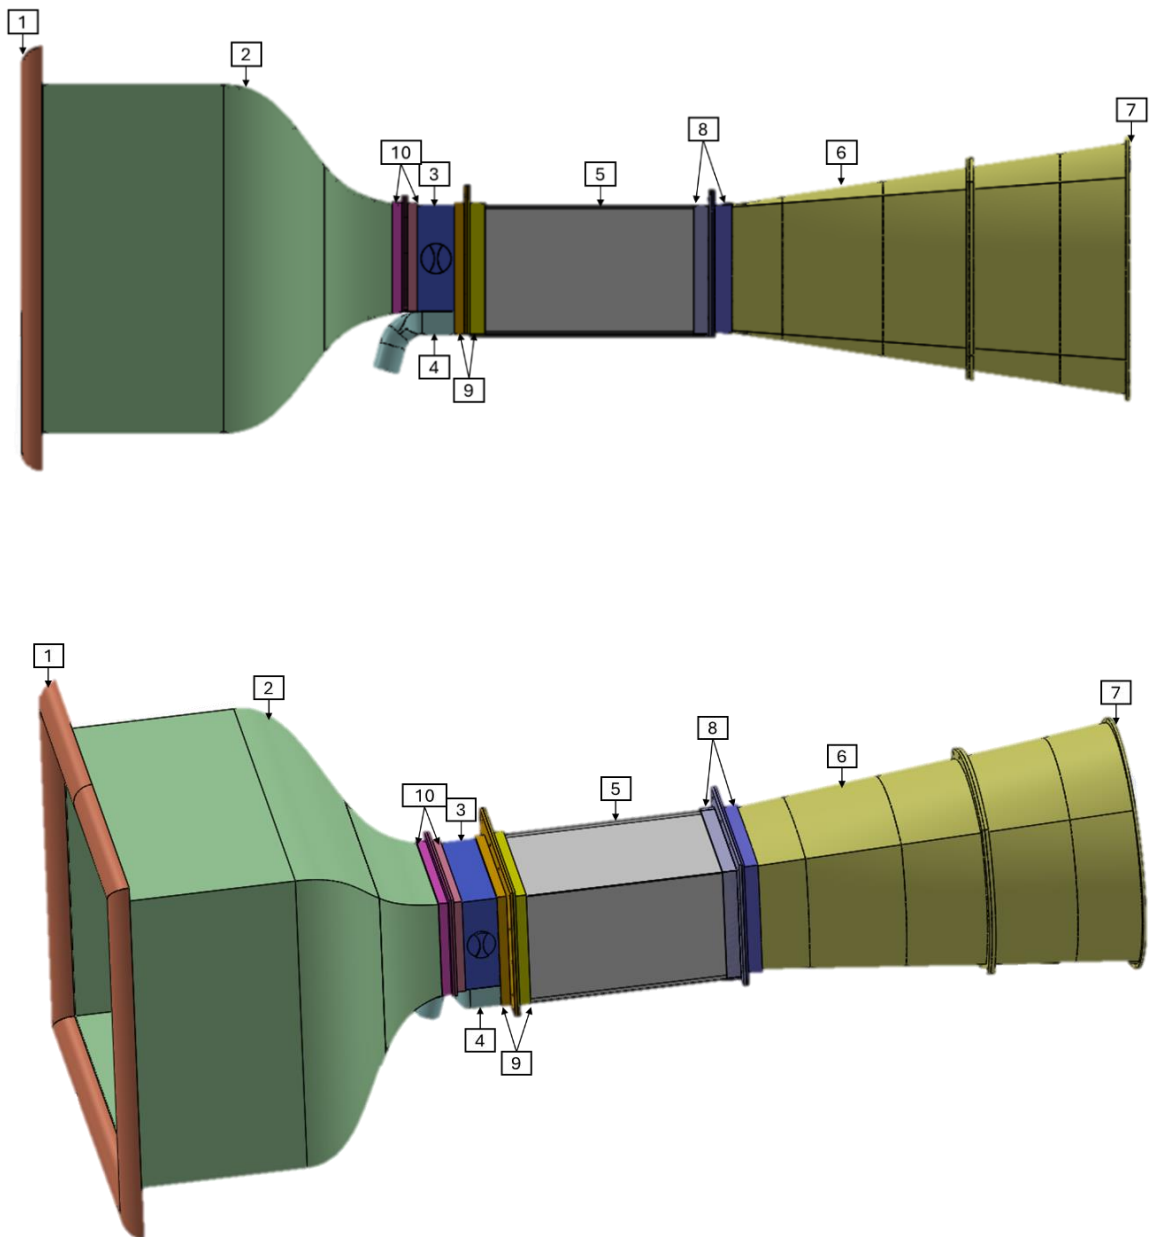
Top view (Top) and orthographic view (down) of the assembled wind tunnel with flanges (Legend table given below).
